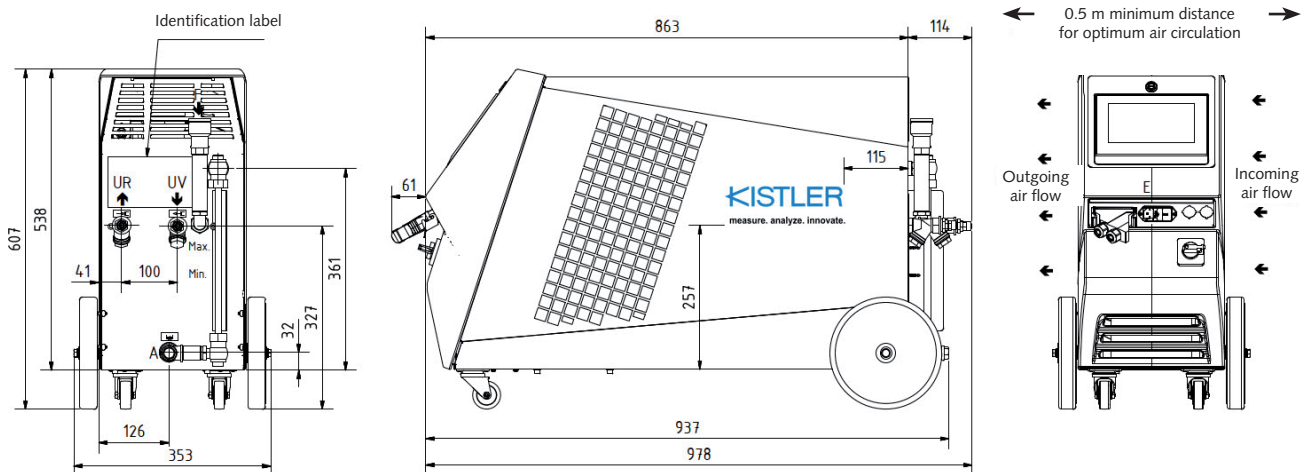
Dimensions of temperature conditioning system Type 2621G...
